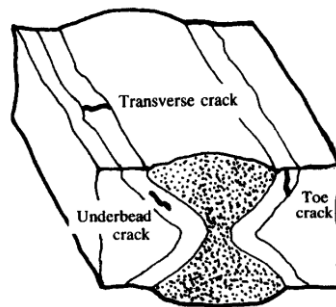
(b): Hydrogen induced cracks in HAZs of fillet welds (Bailey et al., 1973)
